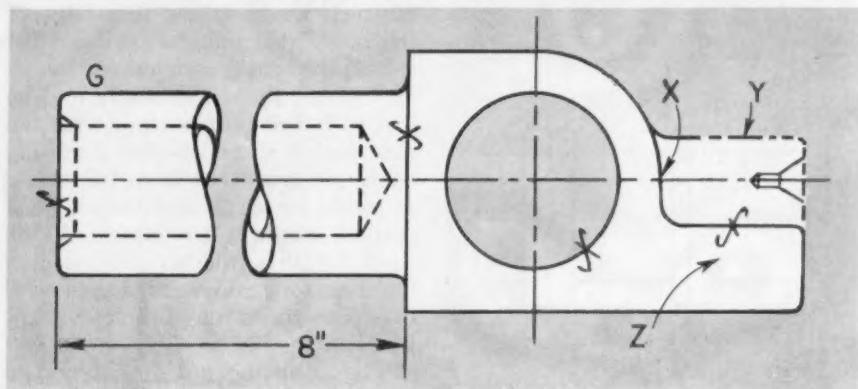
Changing the design of the part by adding a centering boss (Y) eliminated several machining problems, and also reduced the cost of making the part.
